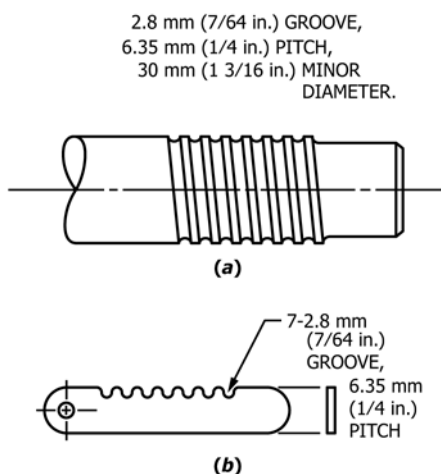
Mandrel for Coil (a) and Coil Spacing Gauge (b)
